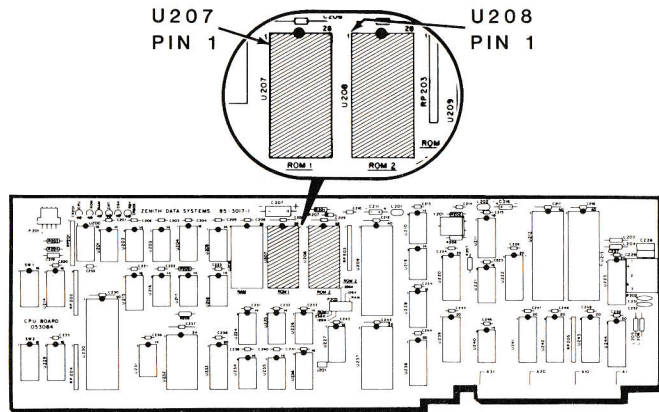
CPU Card (PCB Part No. 85-3000-XX)
